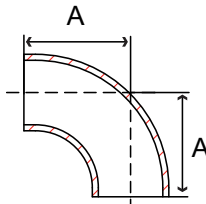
L2S4 & S77L2S6 – 90° Tube Bend (Long Radius)
